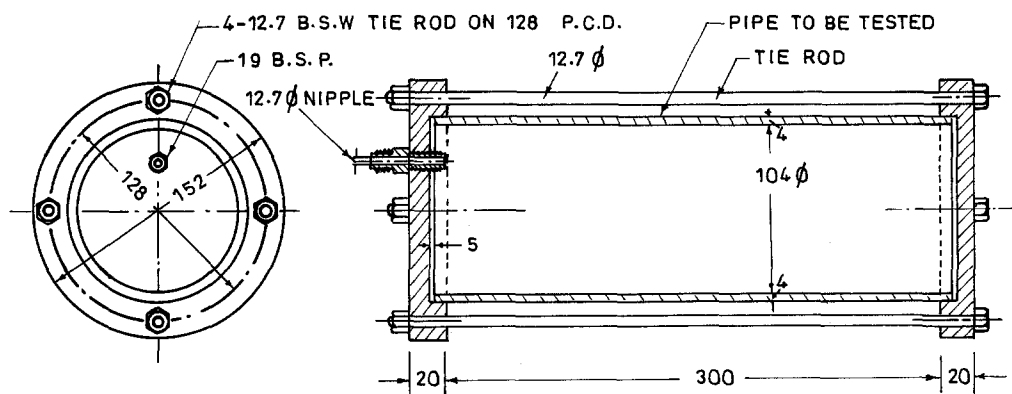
GRP tube for pressure testing (all dimensions in mm).
